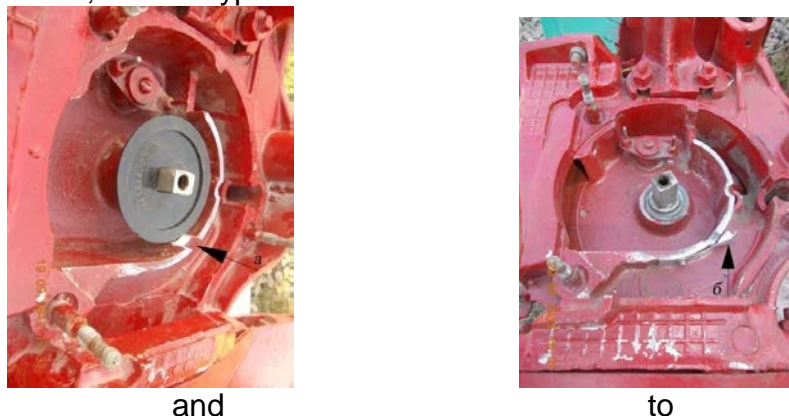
Elements housing completions sowing device SUPN-8 for an extra feeder: a - hole slotted seeds in return chute; b - additional intake tray.
